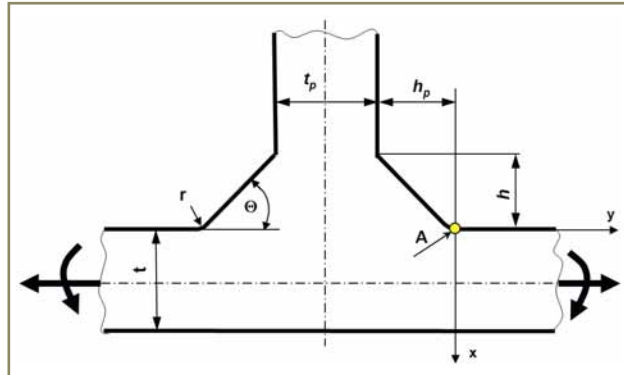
Geometry and dimensions of a T-butt welded joint subjected to axial and bending load
